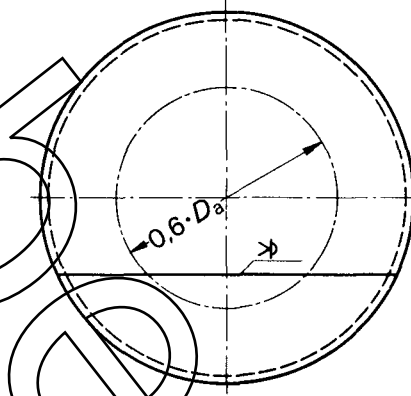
Welded joint inside  $0,6 D_a$
